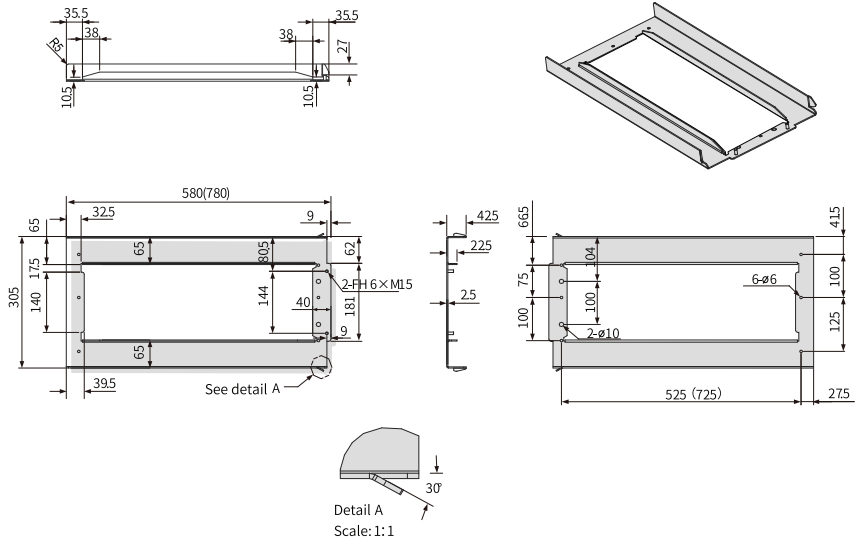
Dimensions of bottom mounting bracket for T10 models (mm)
